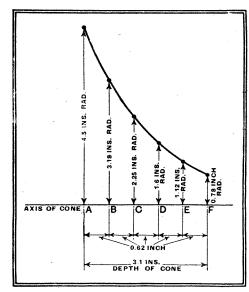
Section through one-half of the cone, showing method of laying out the dimensions.
